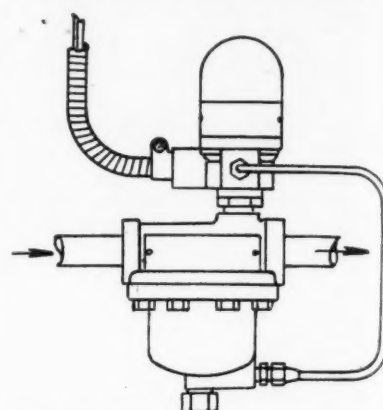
Showing how the valve described in Fig. 1 is hooked up with a solenoid valve to regulate and modulate liquid flow.
